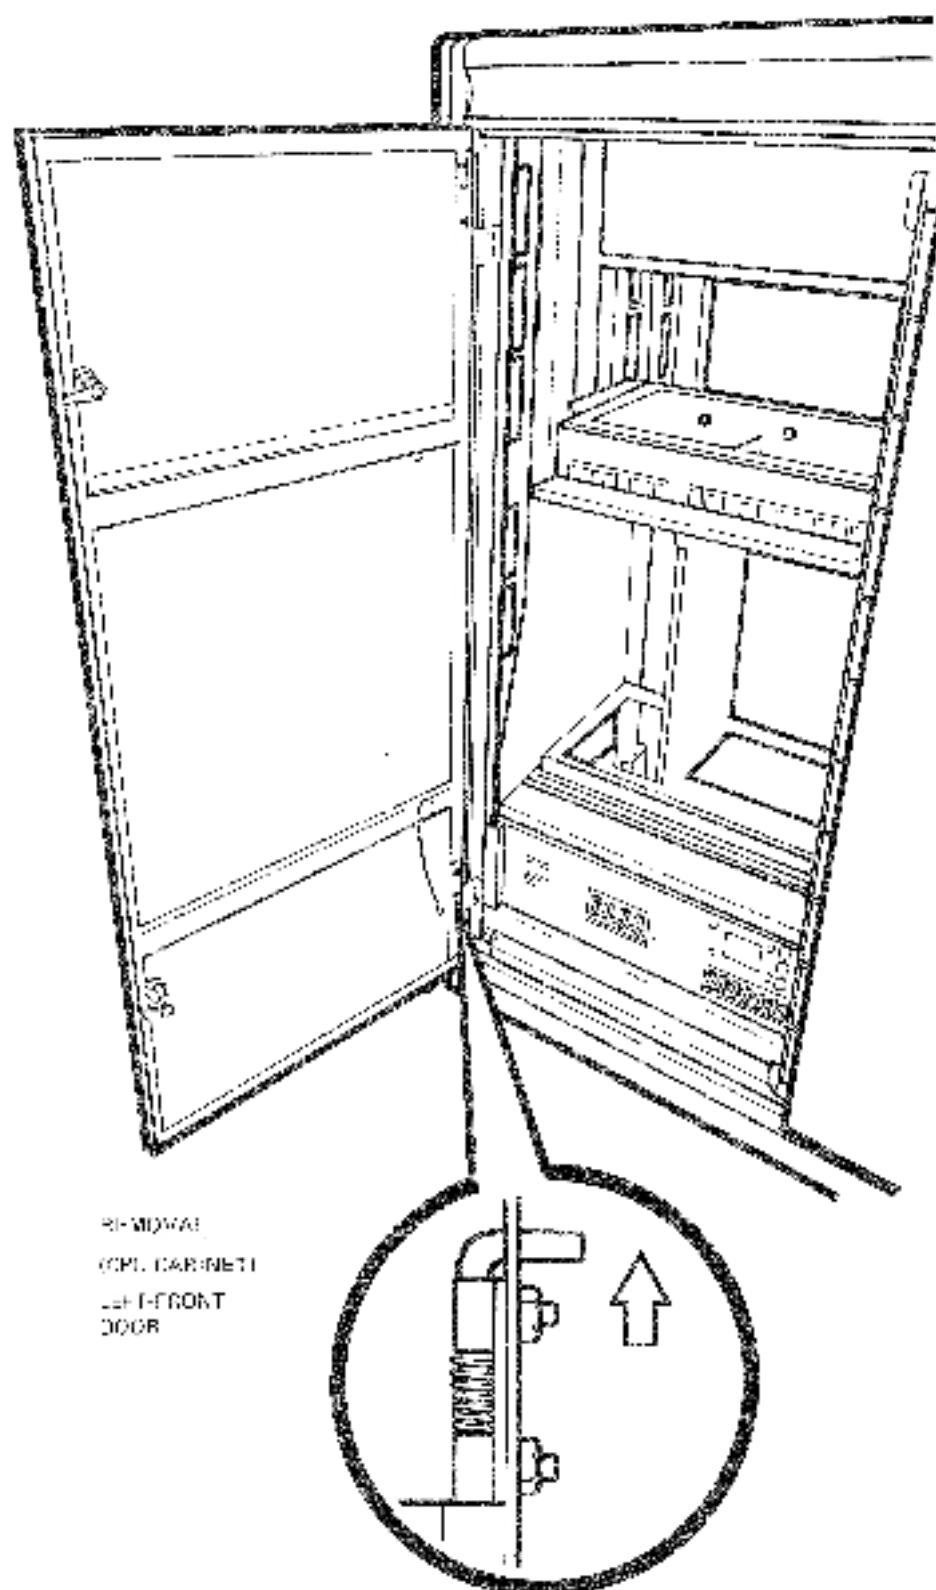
CPU and Front-End Cabinet Mating (Sheet 1 of 9)
